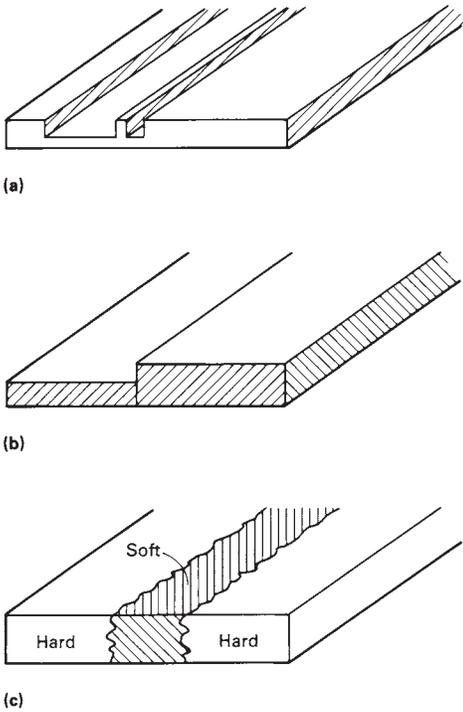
Special treatment of copper alloy strip for optimized combinations of formability and spring characteristics. (a) Profile milled strip. (b) Dissimilar thicknesses longitudinally welded; this method can also be used to join dissimilar alloys. (c) Localized heat treatment (electron beam softening)
